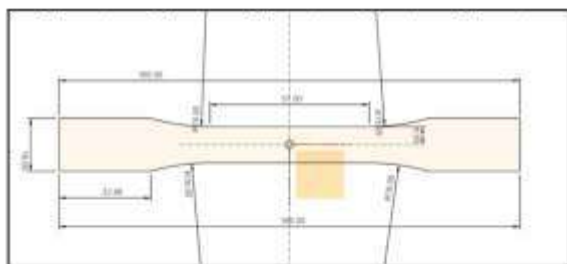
Dimensions of specimen ASTM D638 Type I (All dimensions in mm)
